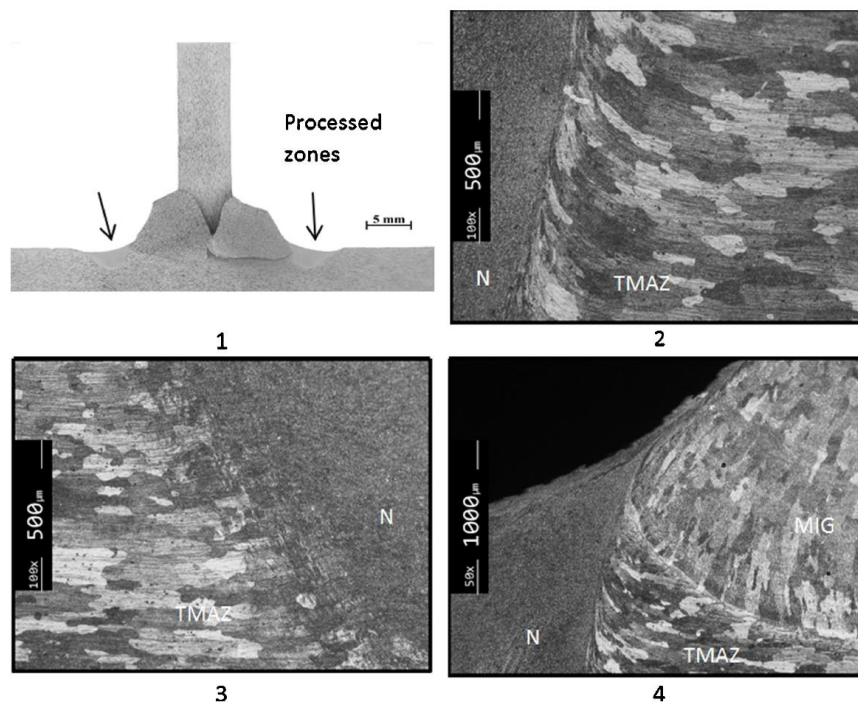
MIG weld made on AA 6082-T651 and processed with tool E: (1) macrograph; (2) advancing side of stir zone; (3) retreating side of stir zone; (4) toe region.
